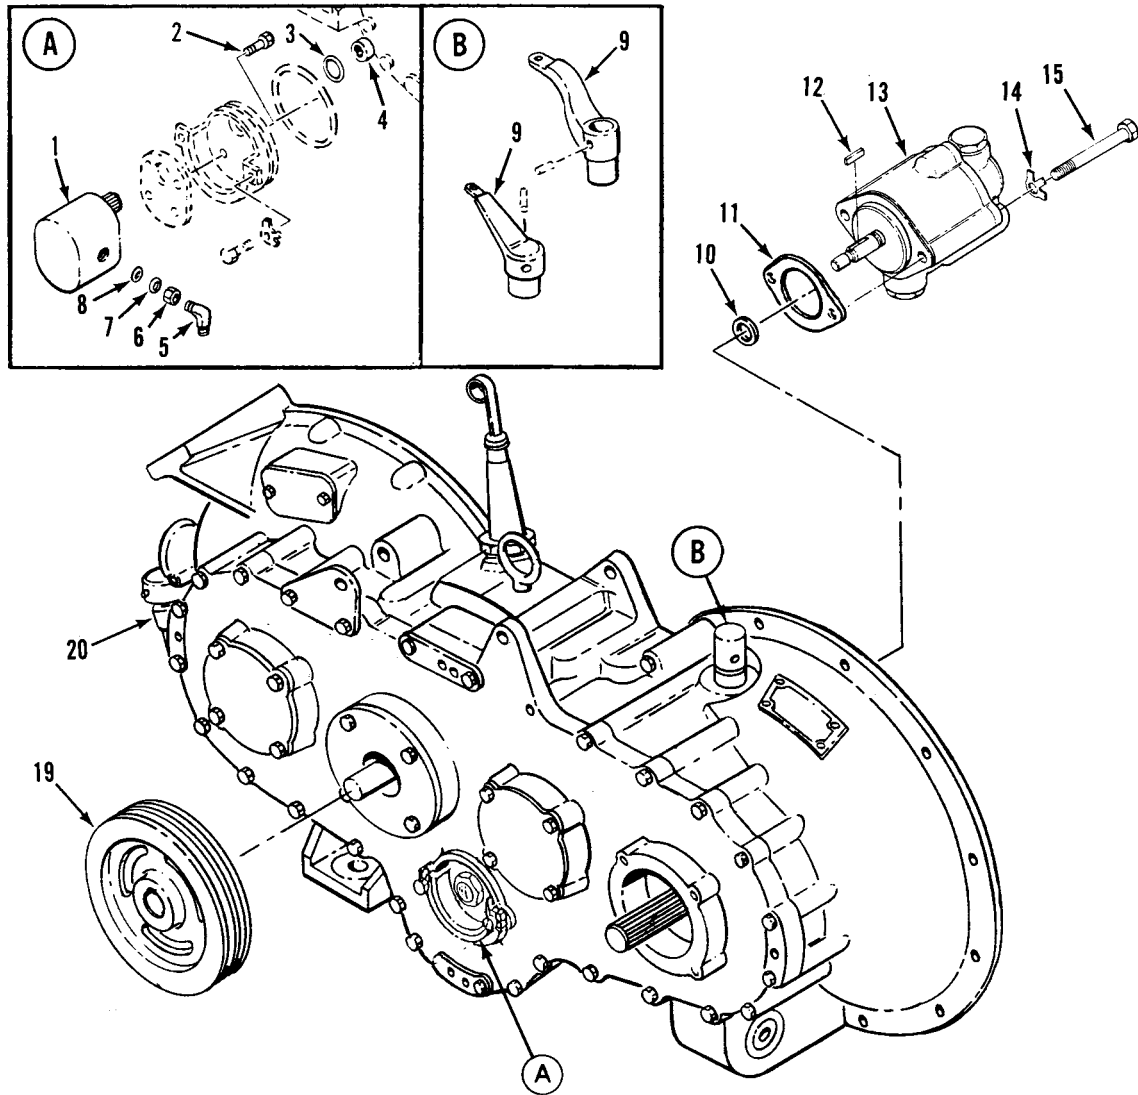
Transfer Gearcase – 10932770, 12253625, 12349527
